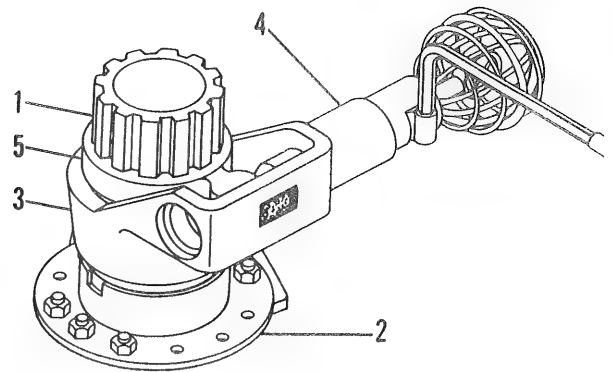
Removal of Hydromechanical Clutch and Fan Assembly
